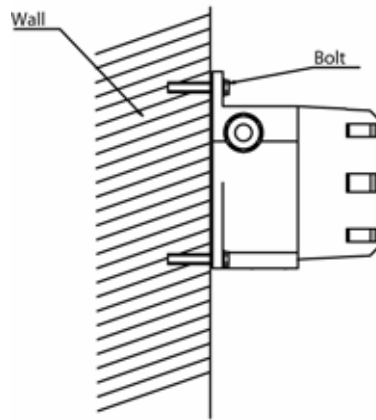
Mounting the DS2 Docking Station™ on a Wall
